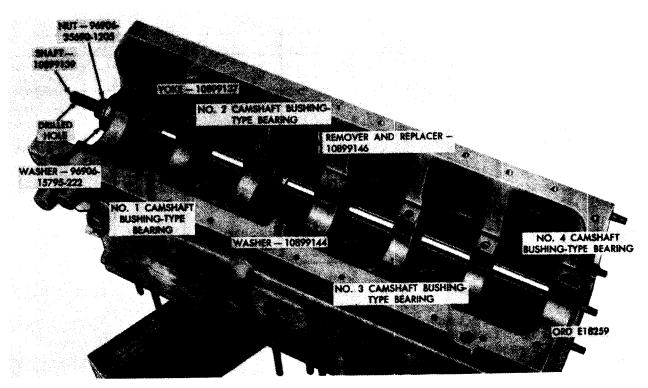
REMOVING NO. 2 CAMSHAFT BUSHINGTYPE BEARING.
